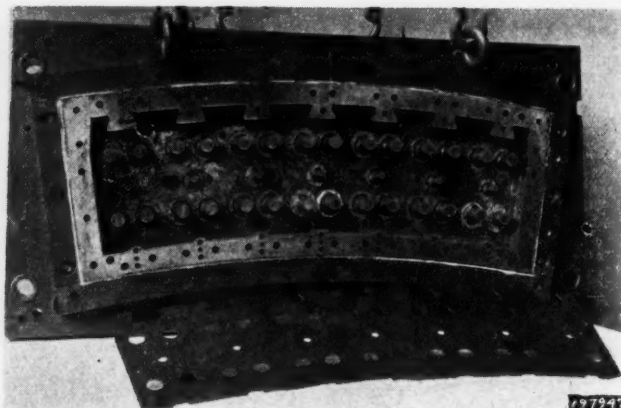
A large die of the sectional type, held in the frame with matrix metal.
